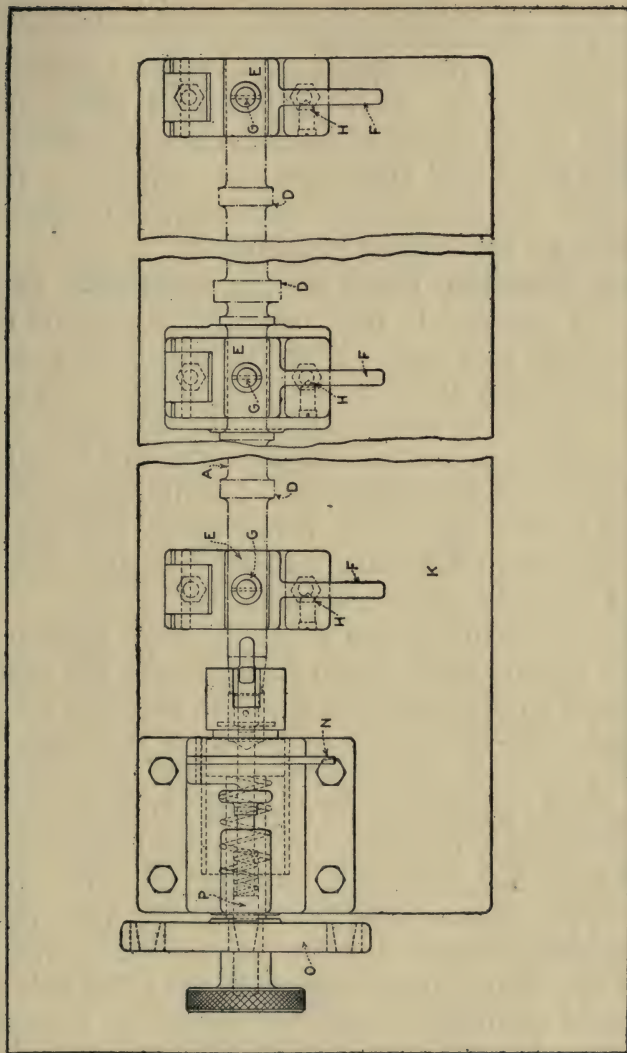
A. PLAN OF INDICATING GAUGE FOR AN AUTOMOBILE CAM SHAFT
